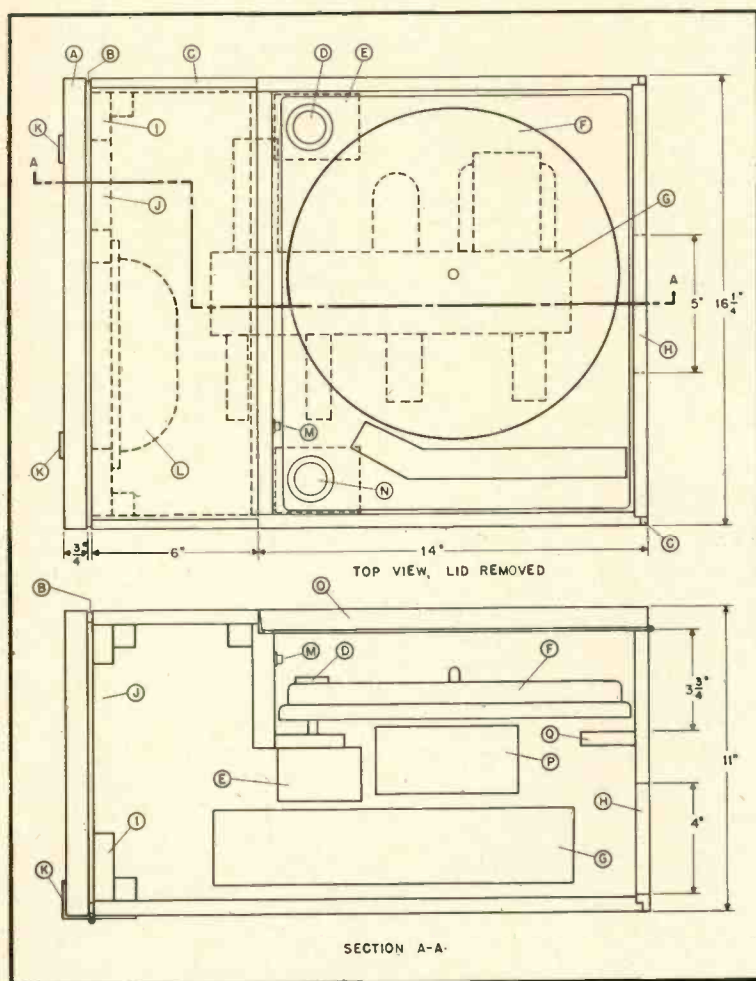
Sectional drawing to show placement of components in the cabinet. The letters refer to the following parts:
